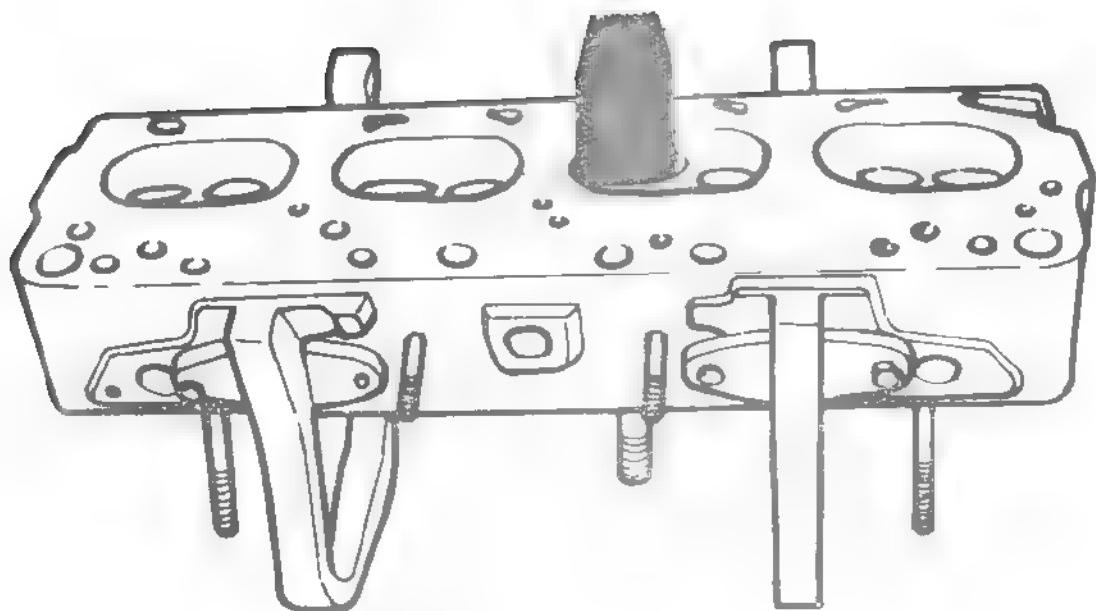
CHECKING CLEARANCE BETWEEN VALVE STEM AND GUIDE, BY MEANS OF D-12 DEVICE.
